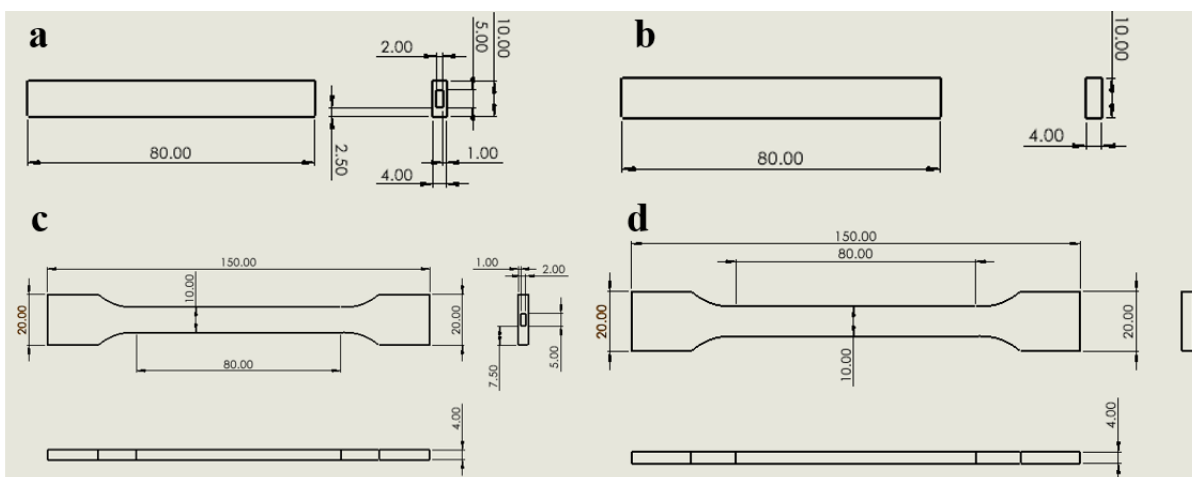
Test pieces designed for the three-point bending tests: (a) pure PLA and (b) LMPA/PLA composite; and test pieces designed for the tensile tests: (c) pure PLA and (d) LMPA/PLA composite (unit: mm).
